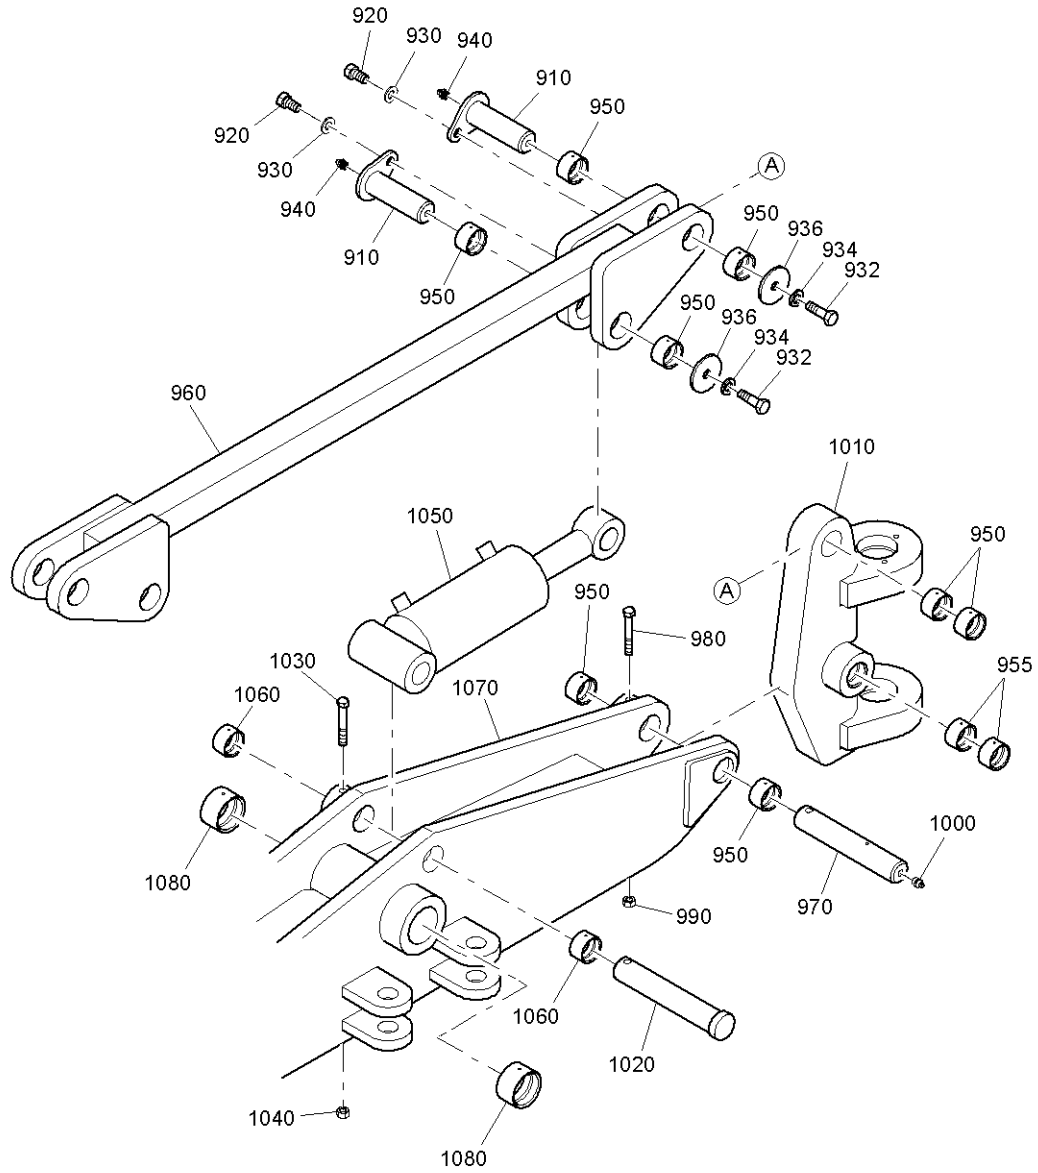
FRONT AXLE ASSEMBLY (SHEET 6 OF 6)
